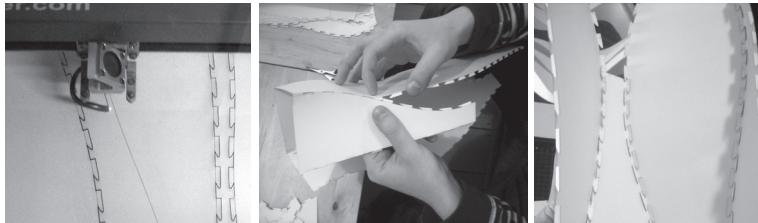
Laser cut fabrication and manual assembly of sheet material
